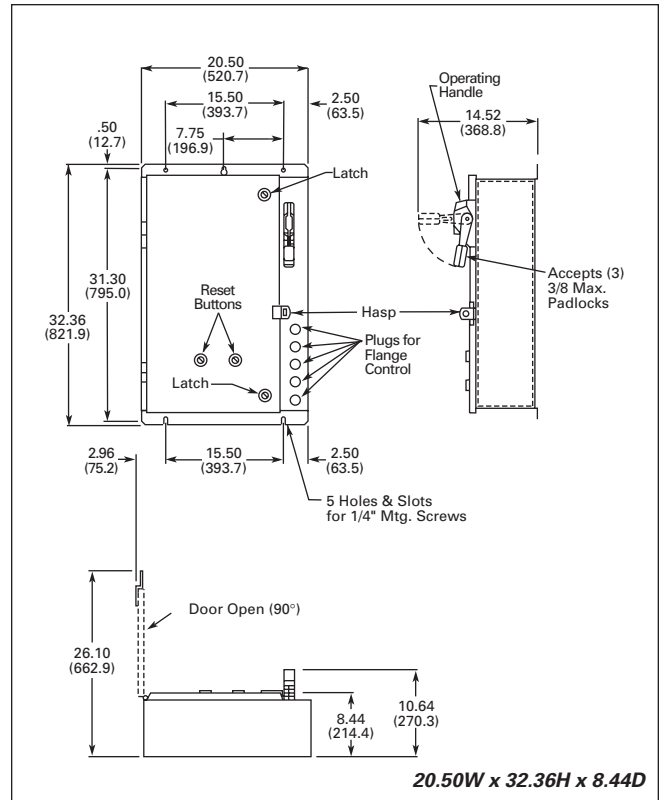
Box C, Type 12 — Approximate Dimensions in Inches (mm)
